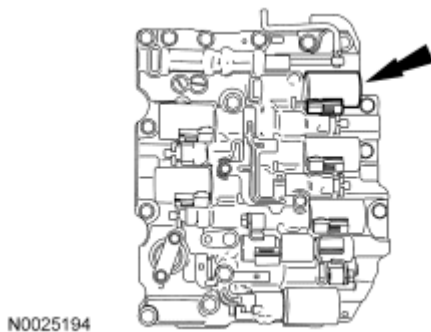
Locating Torque Converter Clutch (TCC) Solenoid
